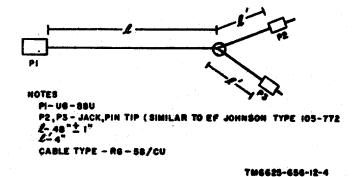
Cable Assembly, Radio Frequency CG-3434/U (4 ft 2 in.).
